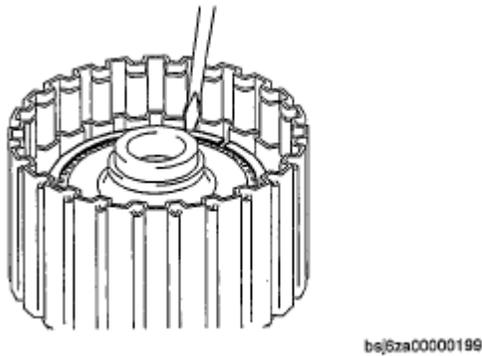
Installing Snap Ring To Input Shaft Component Using Flathead Screwdriver
